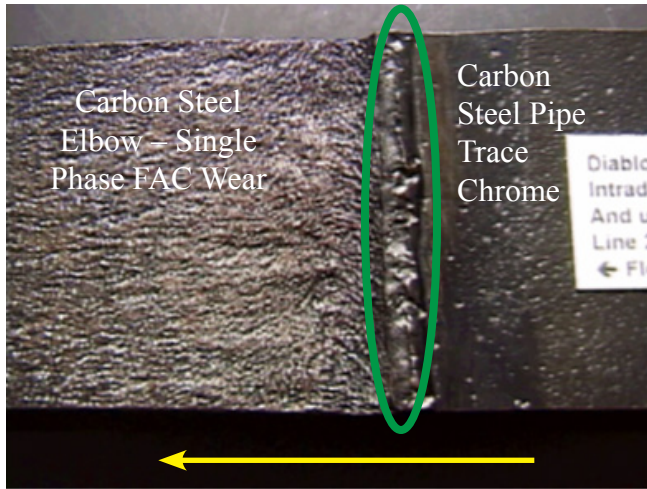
Close-Up view of region in vicinity of trace chrome pipe to carbon steel elbow weld [28]
